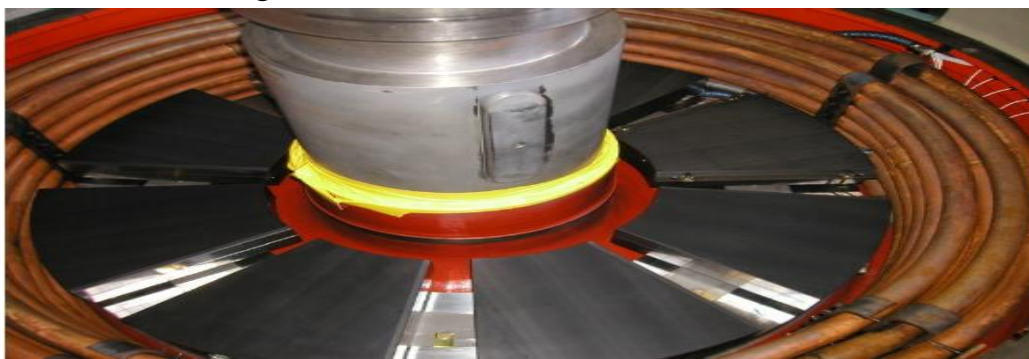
Internal water cooler in the bearing housing (ALSTOM Hydro)
